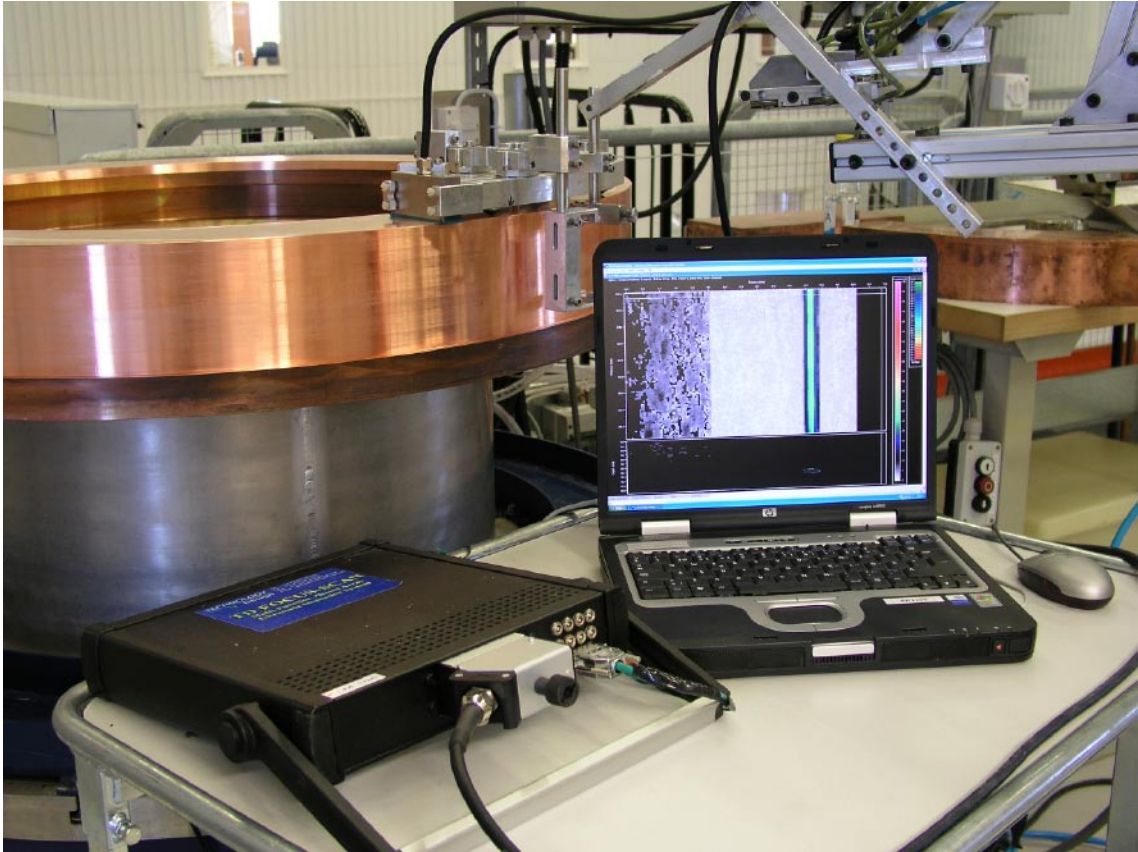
Ultrasonic inspection unit for testing of the copper canister's sealing weld.
